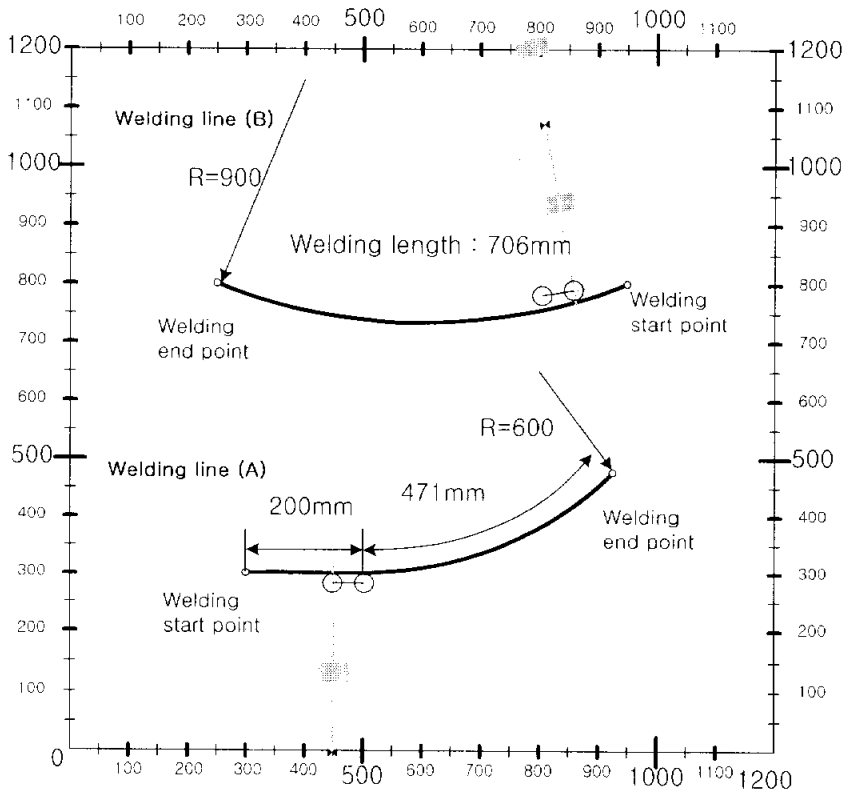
Reference smooth welding line for welding experiment
